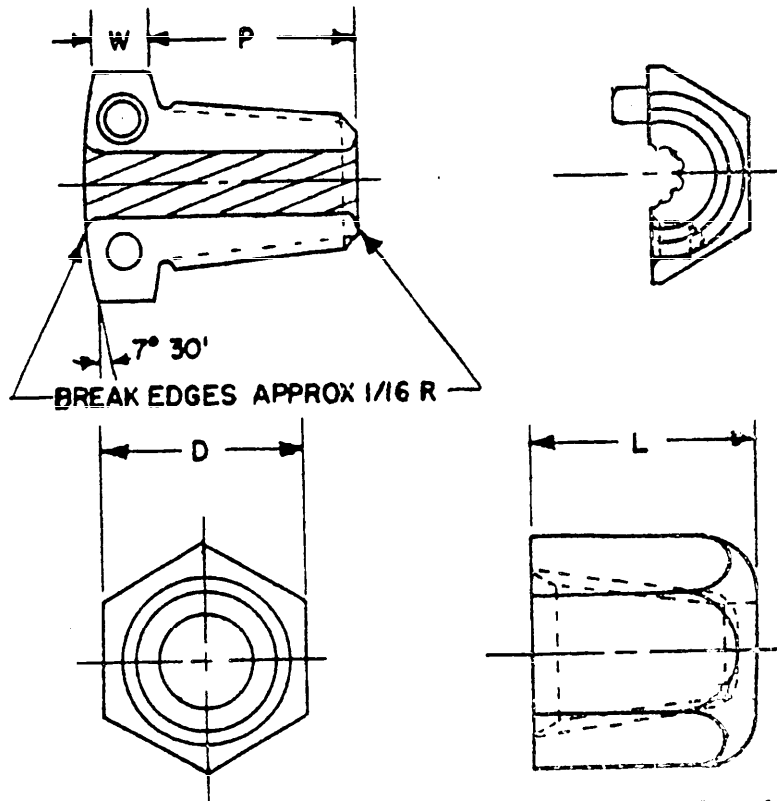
Type IV, double grip, two threaded and tapered half-clamps with mating hexagon nut.
